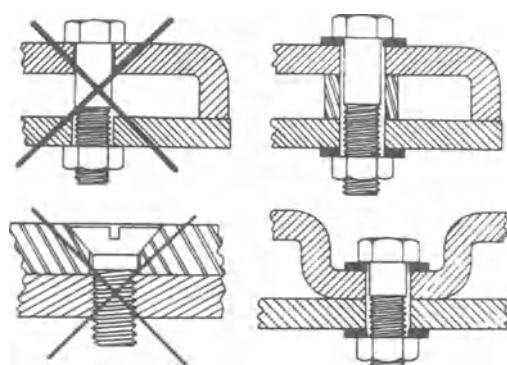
Examples of screw and bolt assemblies with the better designs on the right side.
